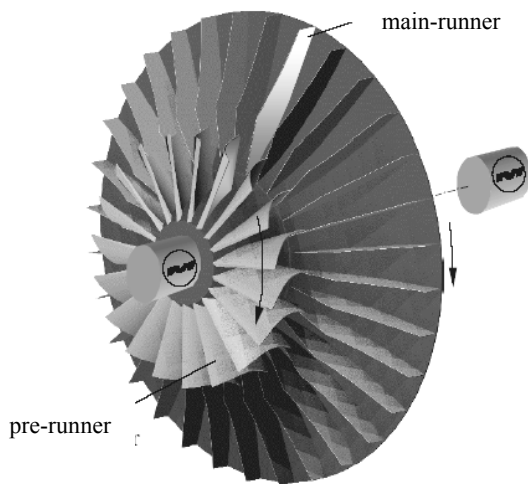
Combined impeller for water vapours centrifugal turbo-compressor [7]
